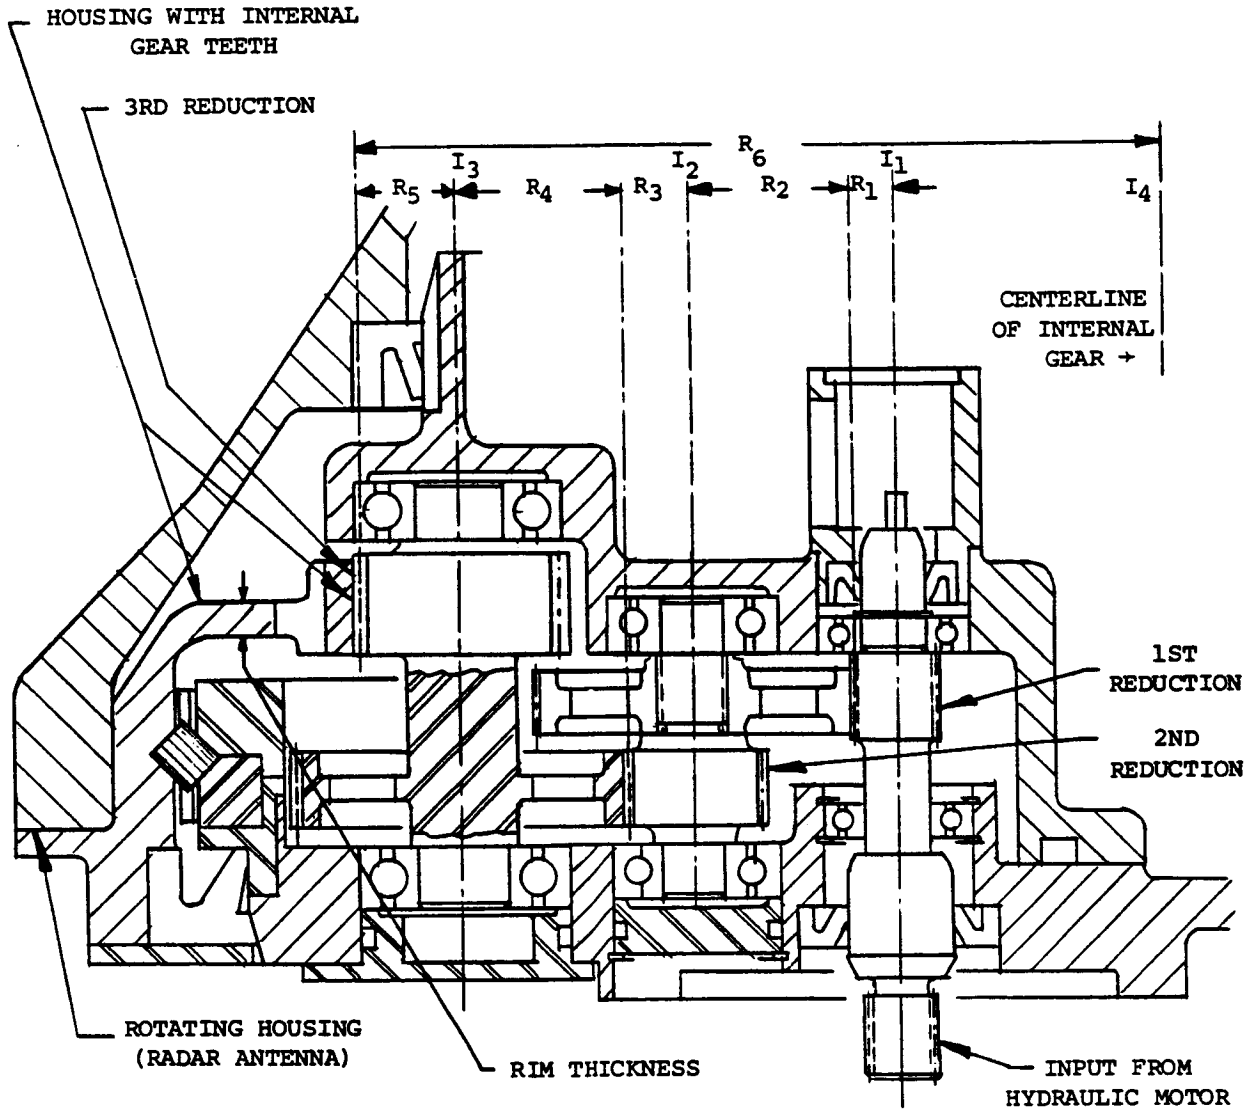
Assembly Drawing of Radar Gear - Reduction Unit
